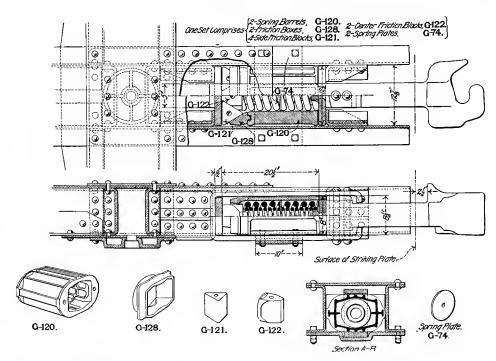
Sessions-Standard Friction Draft Gear, Type H, for Freight Cars with Pressed Steel Underframes. Standard Coupler Company.
